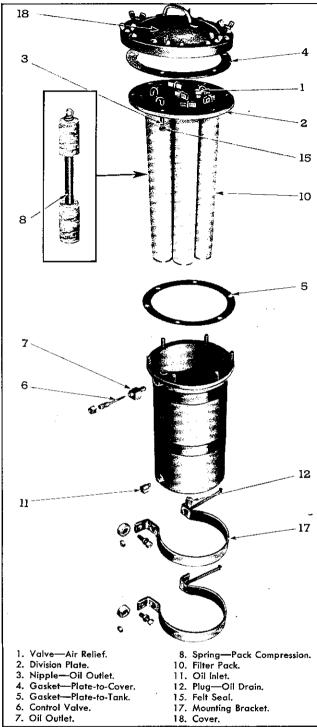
Details of Cleanable Type Lubricating Oil Filter.
